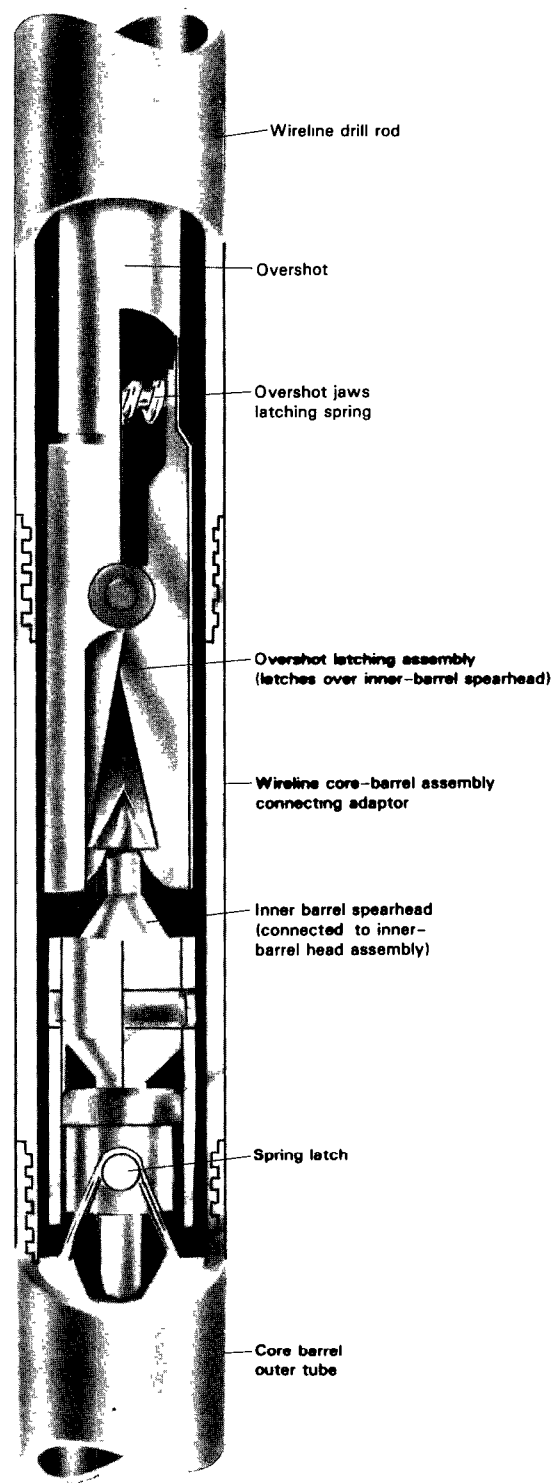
Wire-line overshoot assembly in locked position on inner-barrel head assembly.
